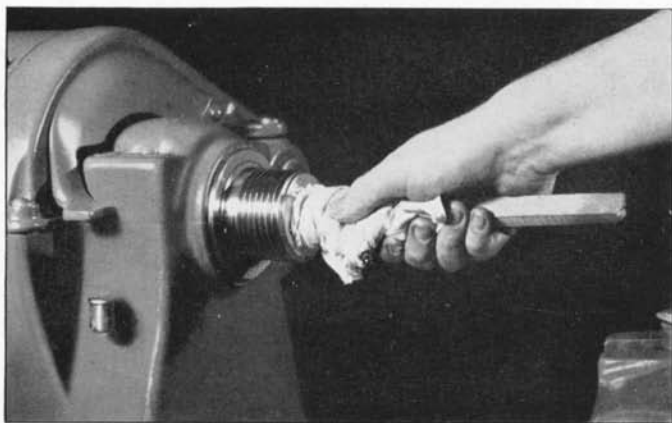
Cleaning taper in headstock spindle with a cloth wrapped around a stick.
